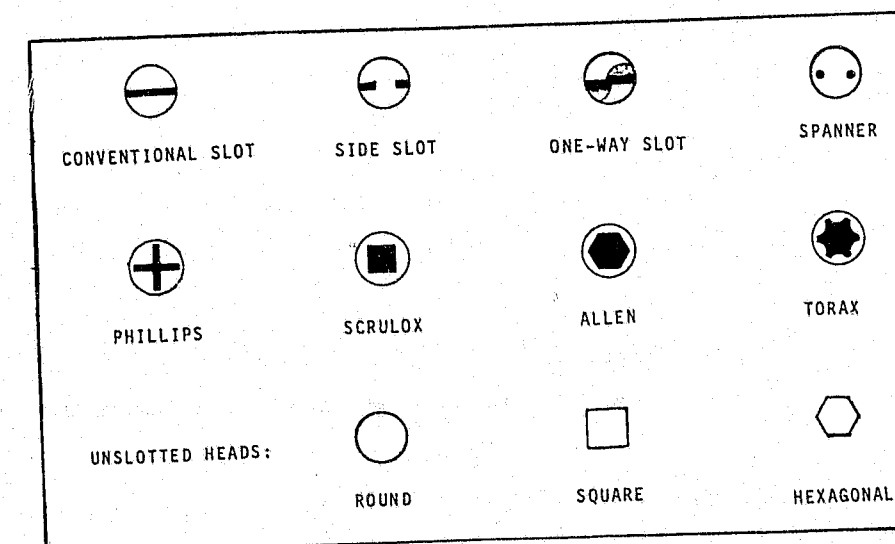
Examples of screw and bolt head fasteners which require special drivers.
